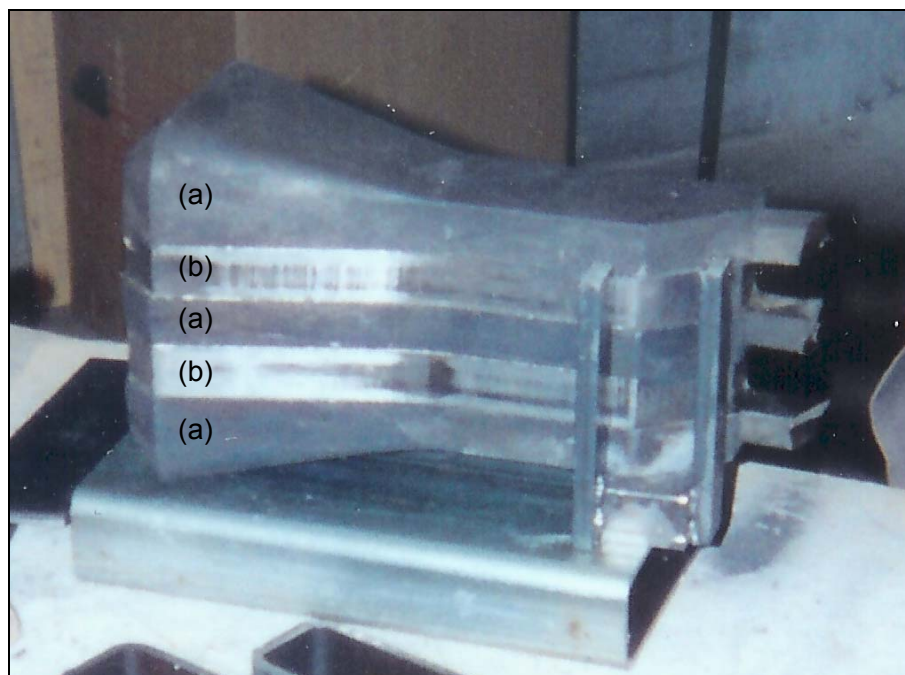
Multi-laminate bucket tooth tip. Layers of white cast iron (a) laminated with manganese steel (b)
